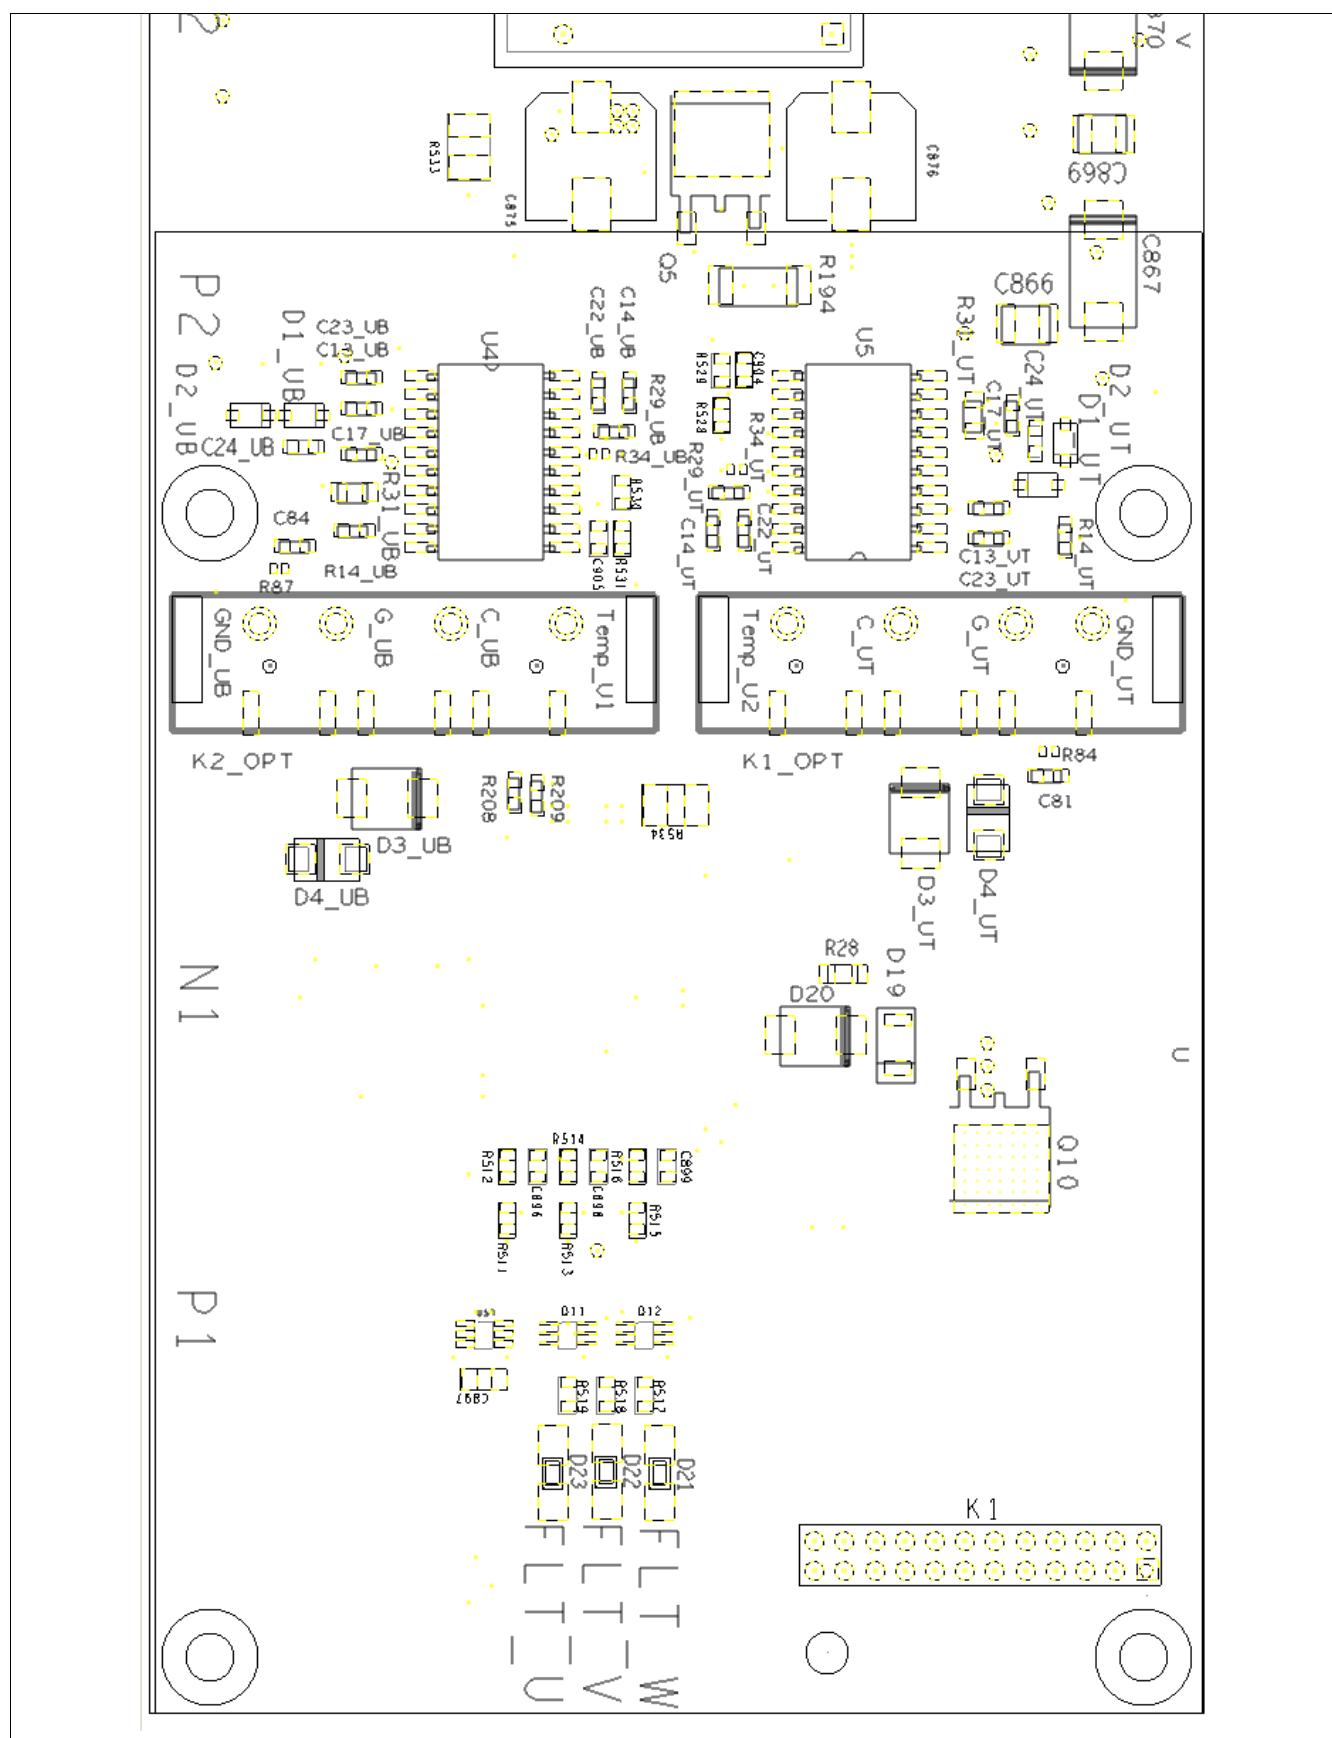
Assembly Drawing of the Driver Board (Top) - part 2
